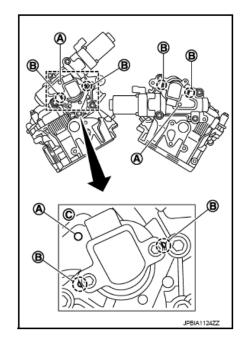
Identifying Matching Marks Of VVEL Control Shaft Position Sensor And Upper Housing
